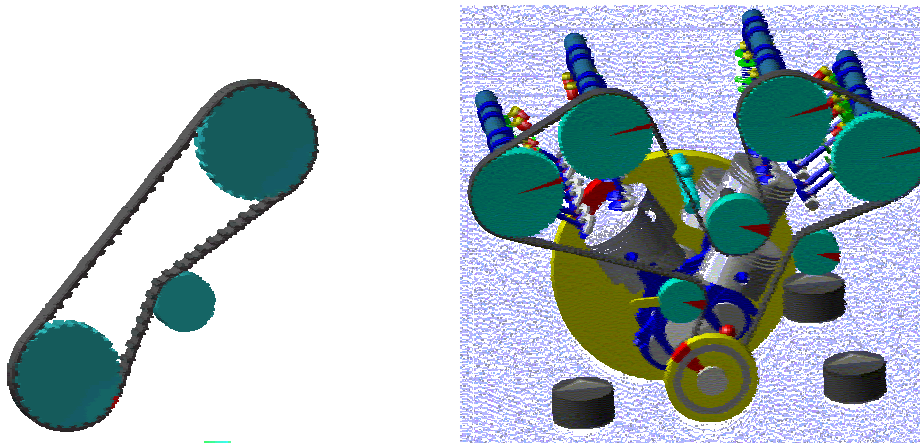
Timing belt and engine assembly including crank train, valve train and timing belt
